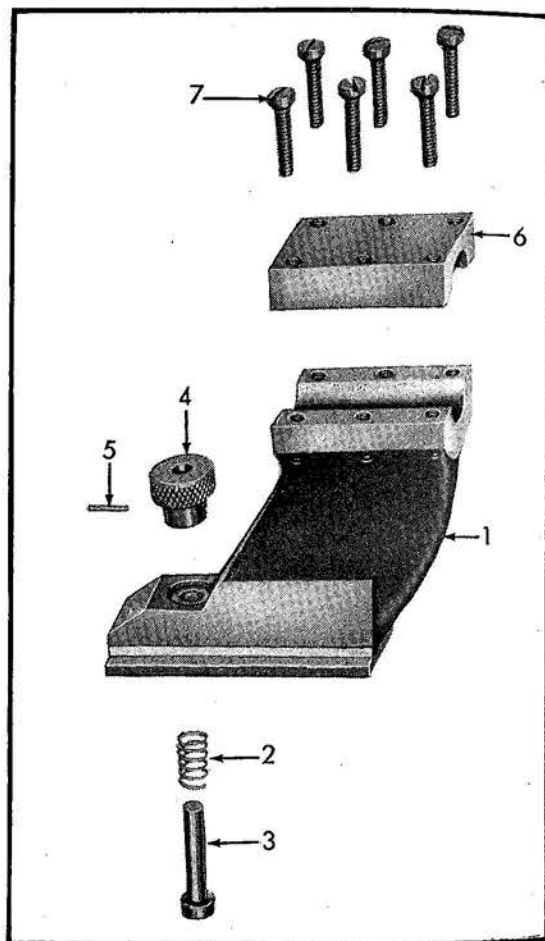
Sequence of Reassembly of Binocular Holder Assembly
